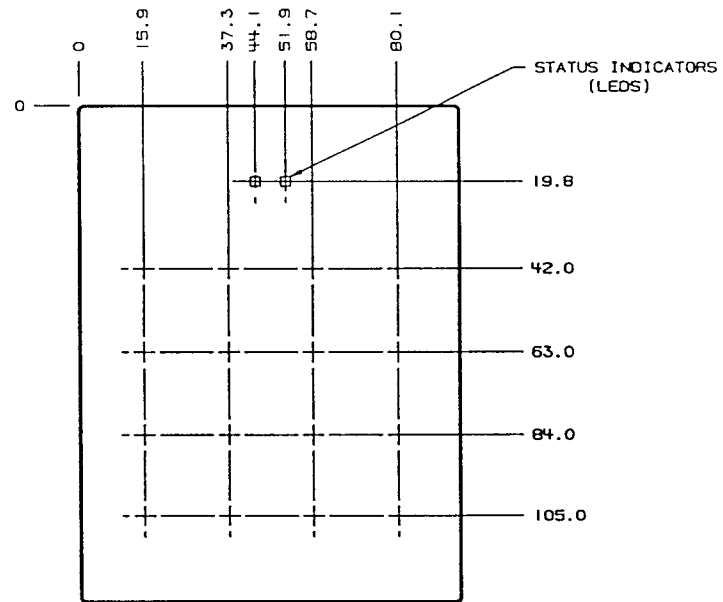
Front Panel 16 Component Gridwork, 2/8 Module
